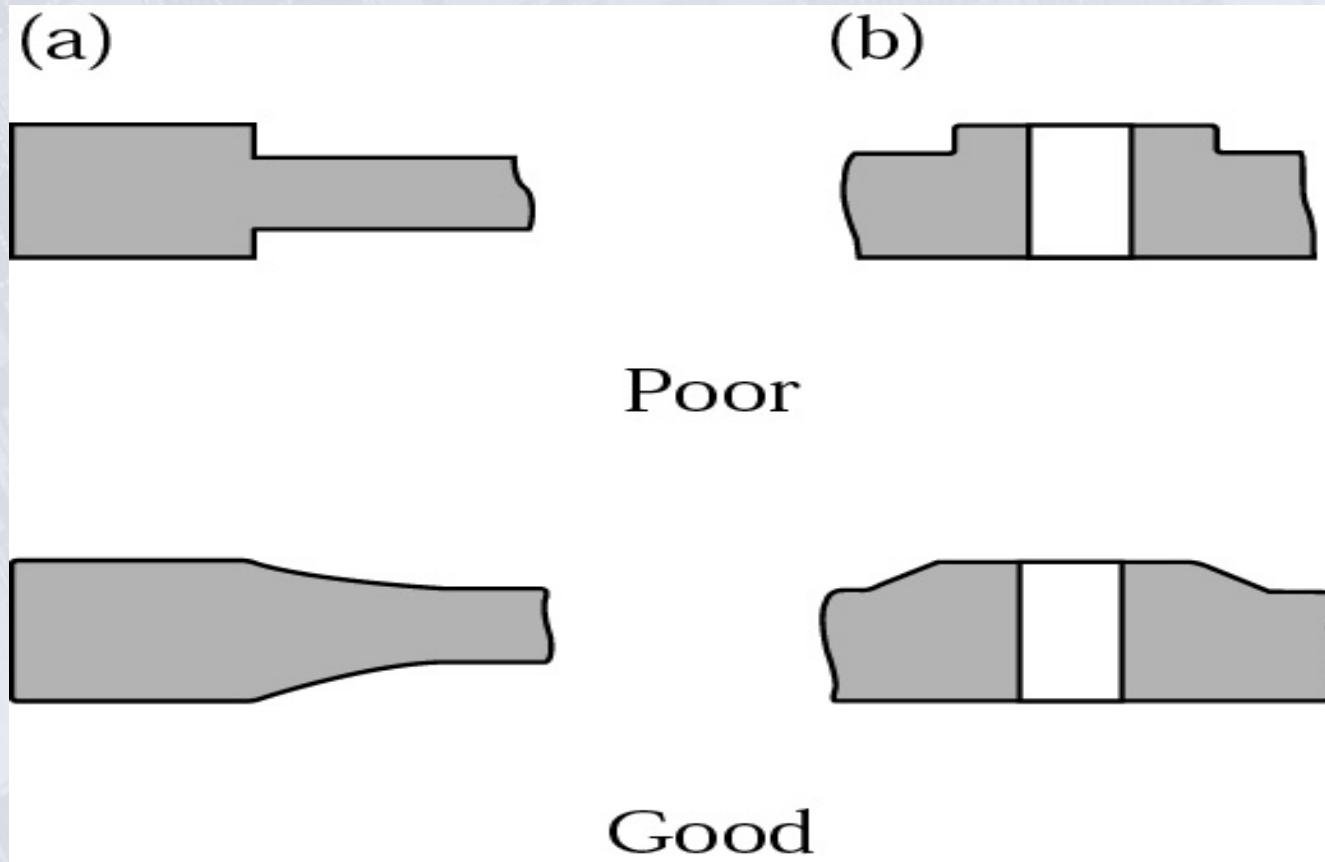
Suggested design modifications to avoid defects in castings. Note that sharp corners are avoided to reduce stress concentrations.
